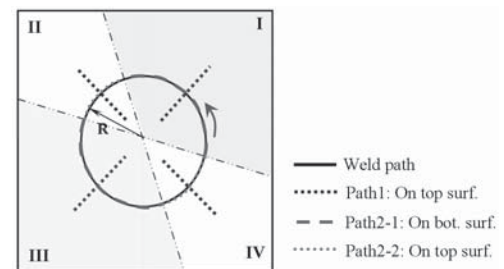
DESIGNED CORRECTION PATHS FOR CIRCULAR PATH WELDING
